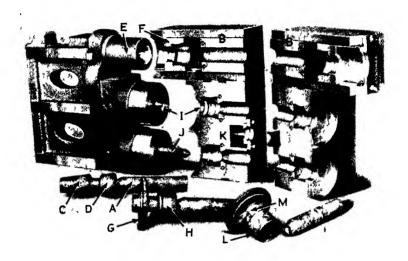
Details of dies and operations to make the flanged piece shown at L and M. The scrap is seen at the right.
